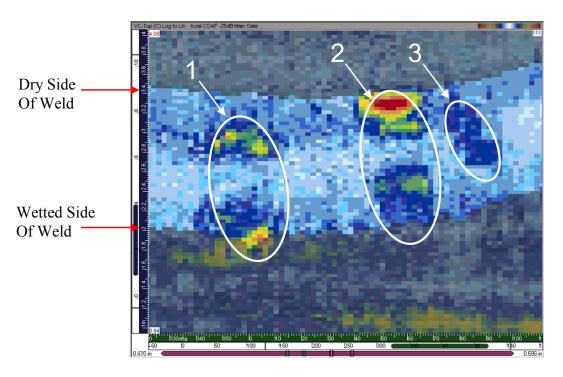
COAF data - Indication Positions and Weld Location in Nozzle 4
